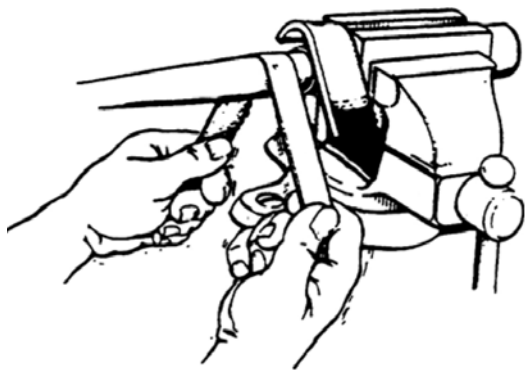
Use 80-grit abrasive paper to remove the flats left by draw filing. Notice that the barrel polishing procedure is similar to shining a pair of shoes.
